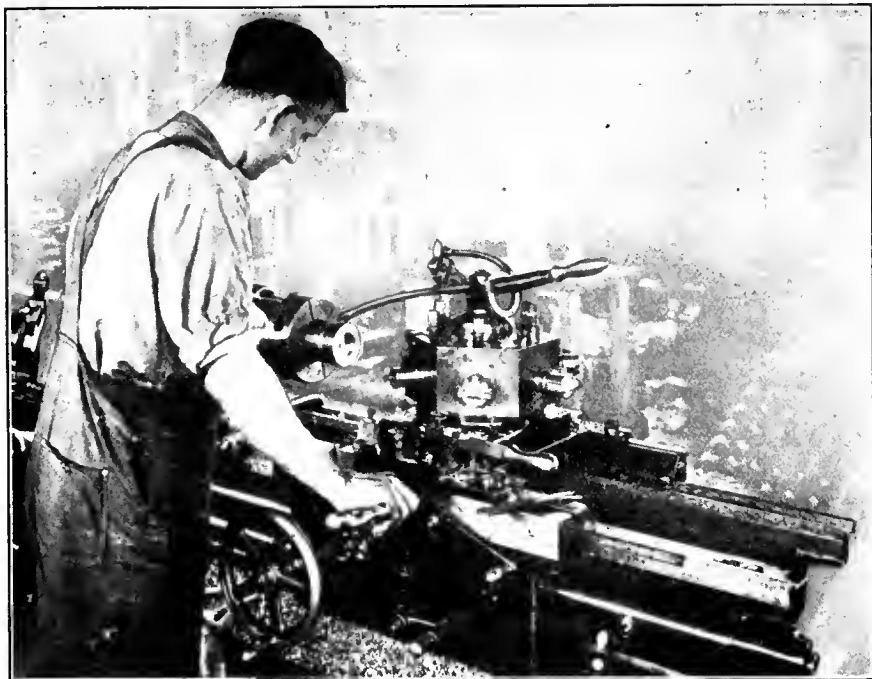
FINISHING BASE OF HIGH EXPLOSIVE SHELLS ON "McDOUGALL" LATHE FITTED WITH TURRET HEAD.
